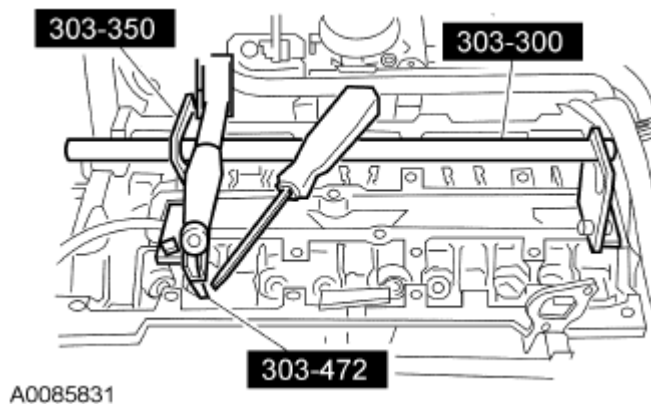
Inserting Valve Spring And Valve Spring Retainer
